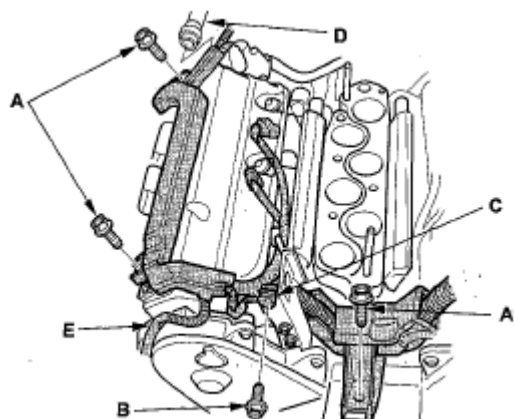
Identifying Harness Holder Mounting Bolts And Engine Ground Cable Bolt
